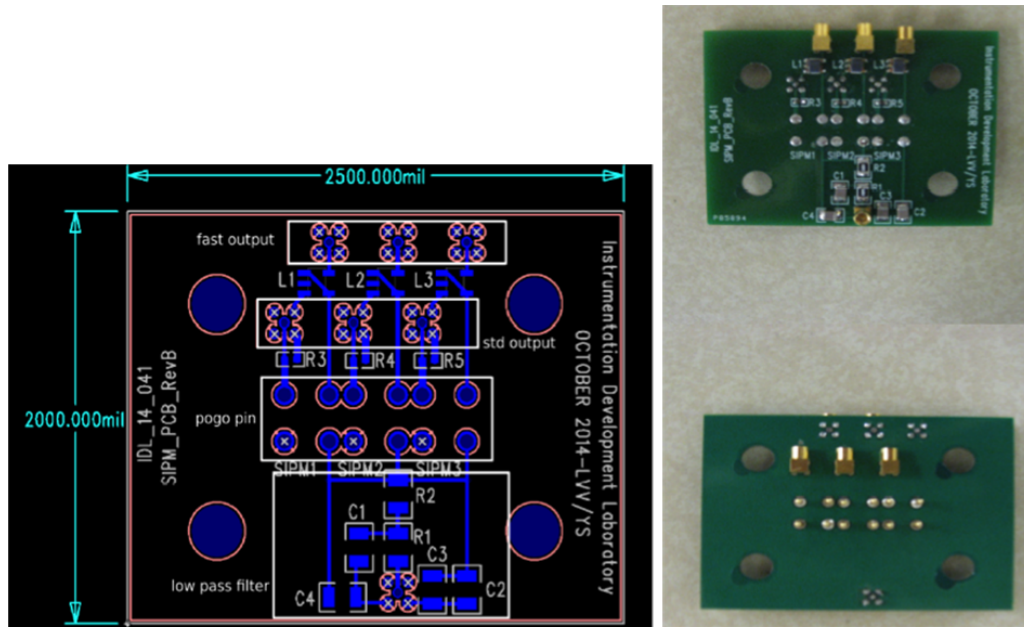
The diagram on the left shows the schematics of the PCB board. The picture on the right shows the PCB as built. This PCB can accommodate three SiPMs for testing.
